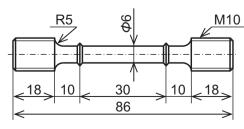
Shape and dimensions of tensile test and creep test specimen.
